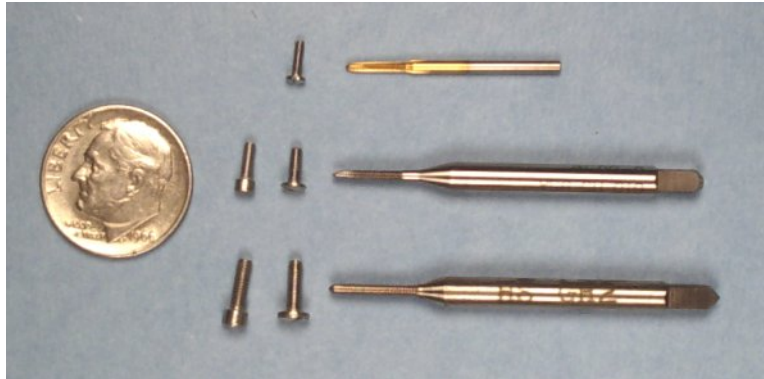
Top to Bottom: 00-90 Screw, 00-90 Tap; 0-80 Cap Screw, 0-80 Screw, 0-80 Tap; 1-72 Cap Screw, 1-72 Screw, 1-72 Tap; US Dime for scale
